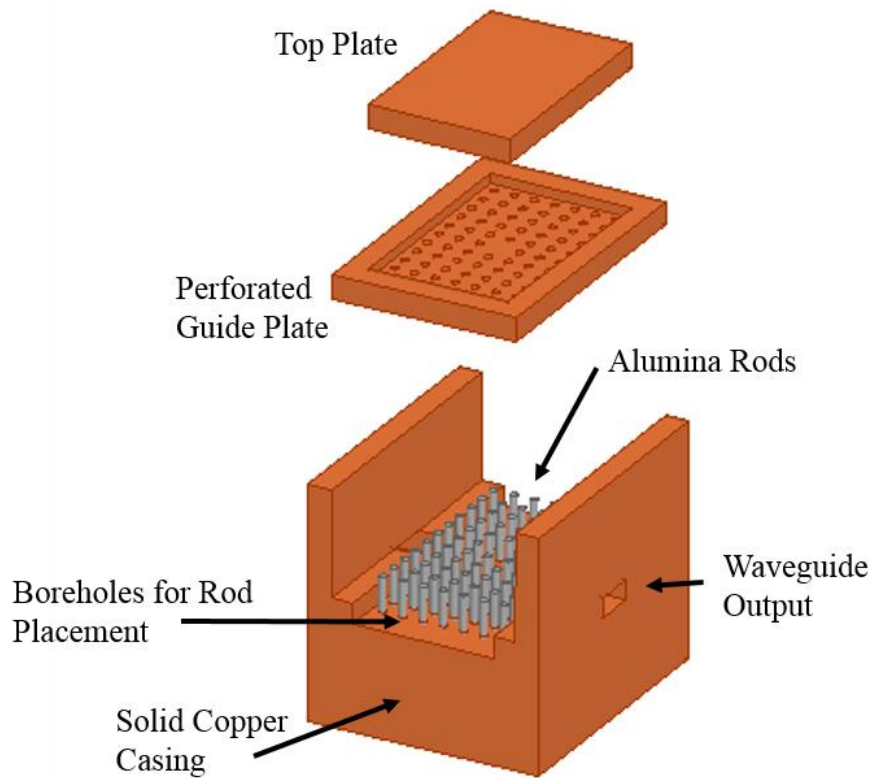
Final design of the 43 GHz PhC device including the main device casing, a perforated guide plate, and top plate. Partially exploded view for clarity.
